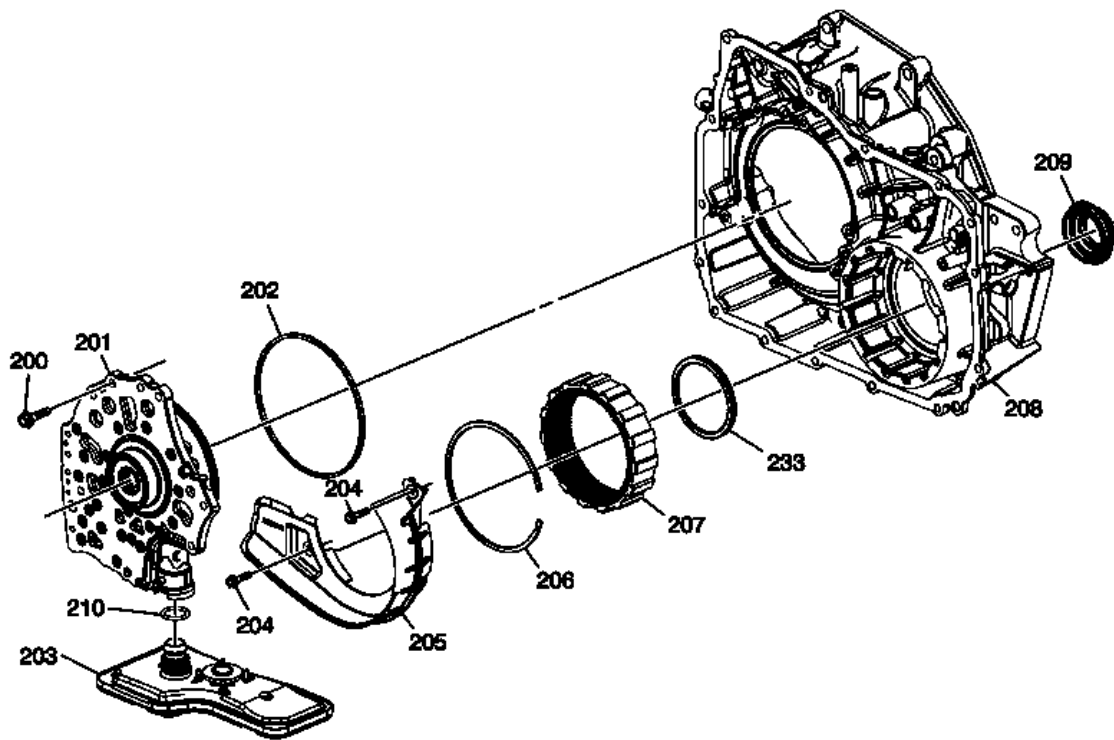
Torque Converter and Fluid Pump Housing Assembly -- 6T30
